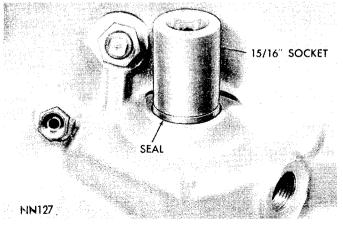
Installing Valve Body Manual Lever Shaft Oil Seal
